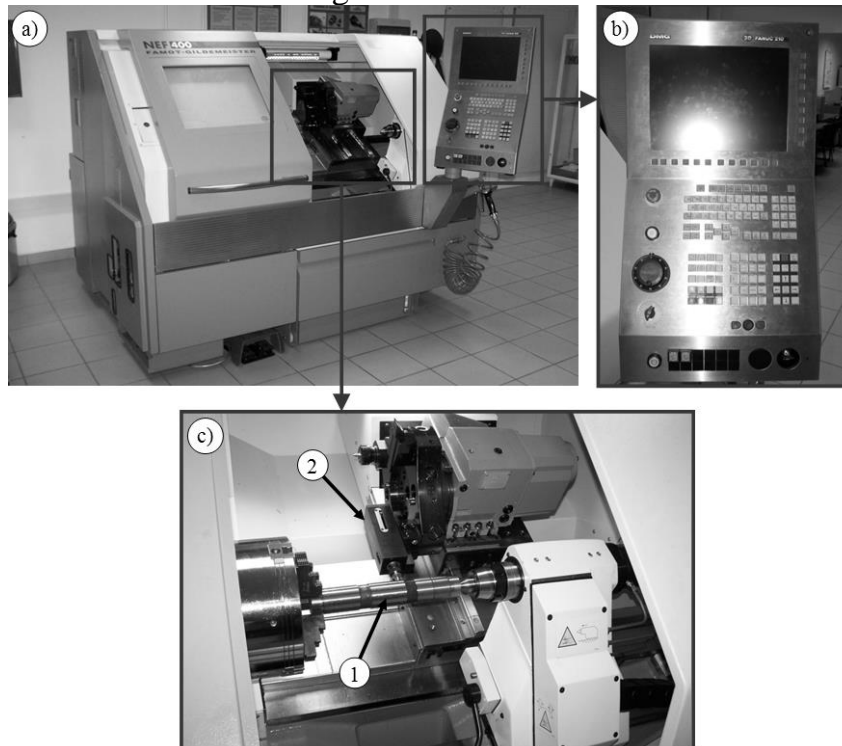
General view of the CNC machining center NEF 400: a) front view, b) control panel, c) workspace with 41Cr4 stainless steel shaft (1) and fixed holder with burnishing tool (2).
